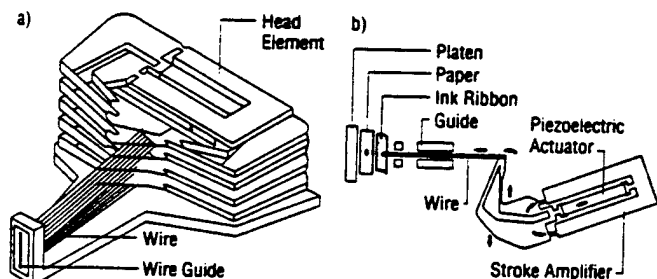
Structure of a printer head (a), and a differential-type piezoelectric printer-head element (b) (NEC).
